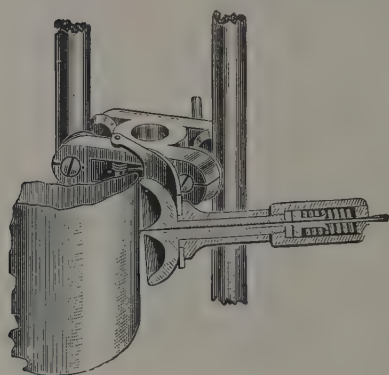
Pencil Holder for Boyer Speed Recorder. Chicago Pneumatic Tool Company.
